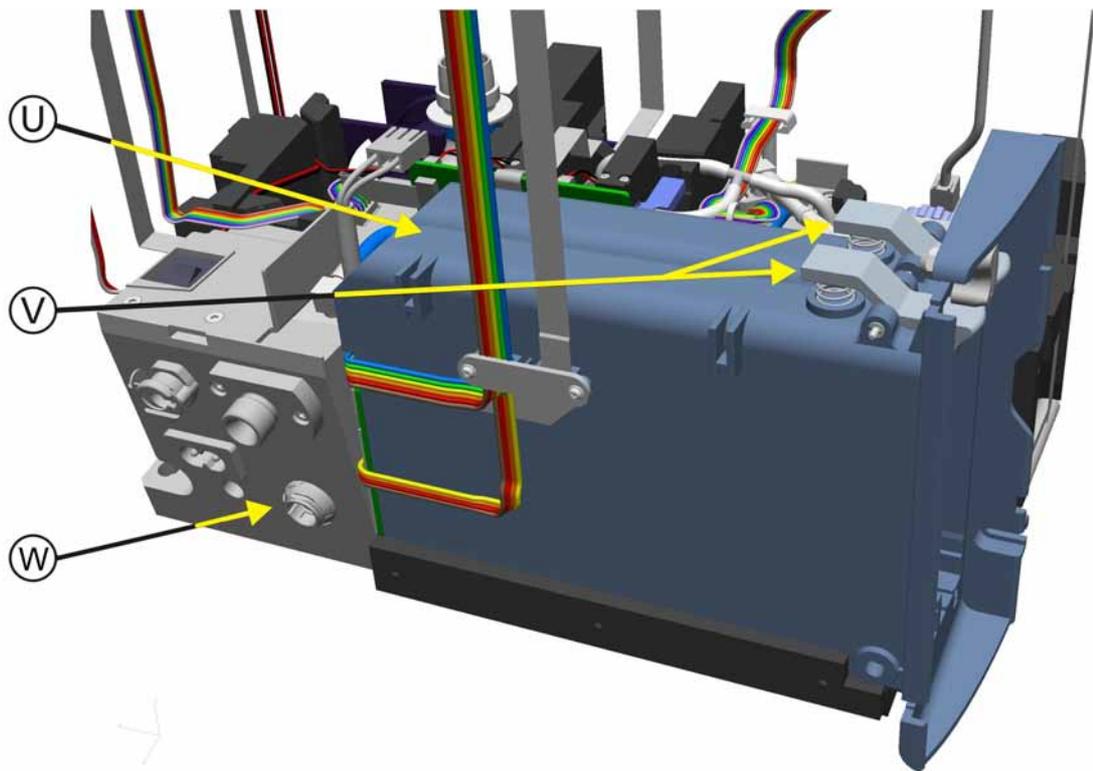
Ventilation Unit Internal Components Bottom Section Rear Overview
